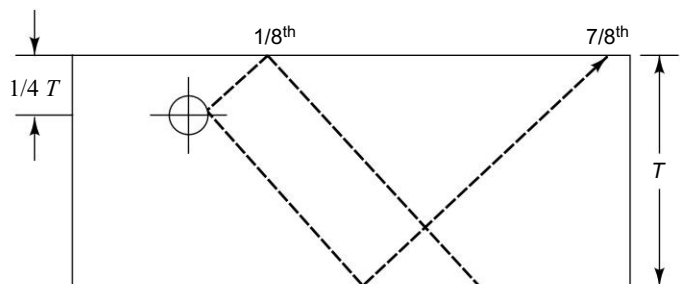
Angle Beaming of Side-Drilled Hole
